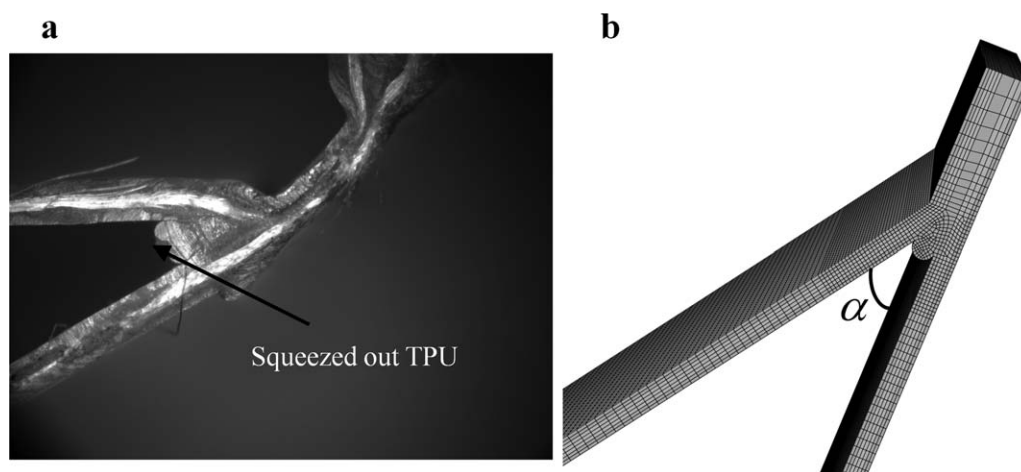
(a) Sample after welding and (b) FE geometric model of the welded sample.
